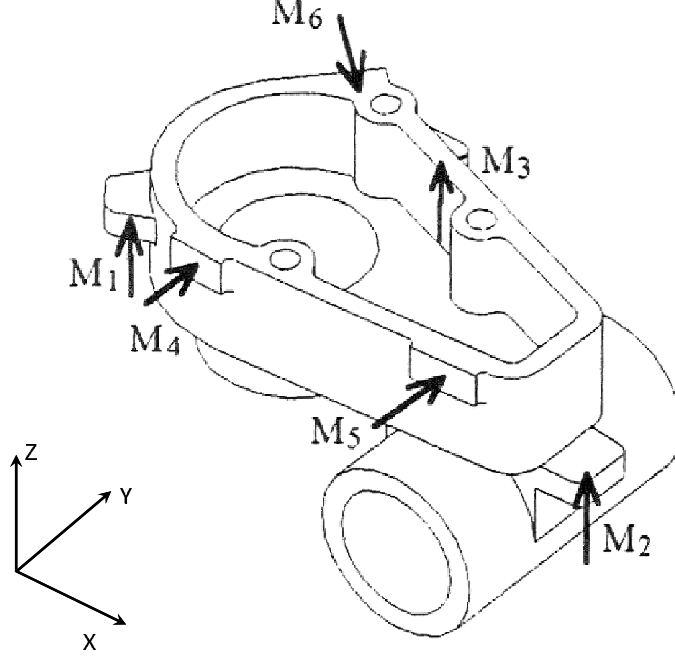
Locating a workpiece by six axial locators (Méry, 1997)
